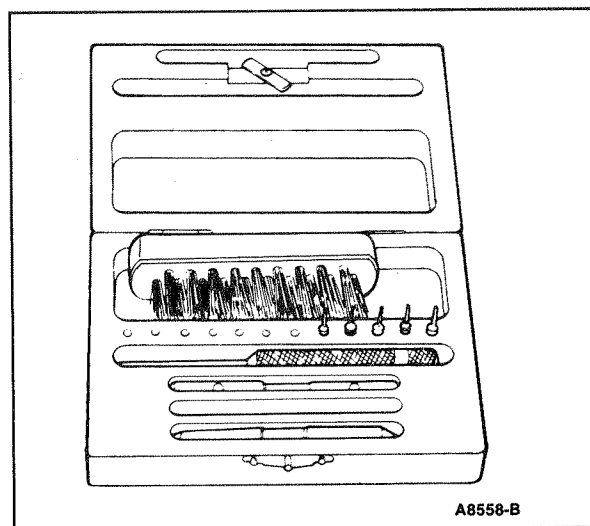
Rotunda 014-00301 Injector Nozzle Cleaning Kit Special Service Tool
